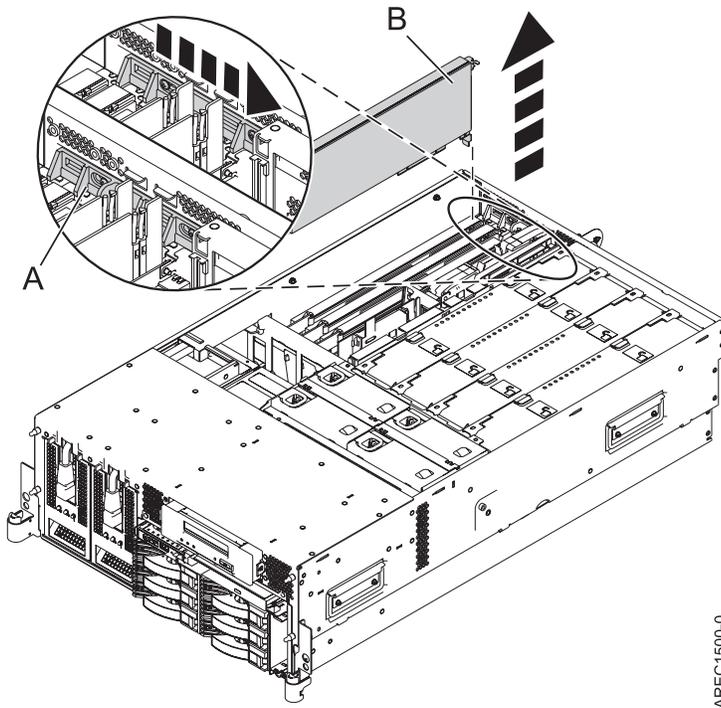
PCI adapter or filler plate removed from the rack-mounted system unit
